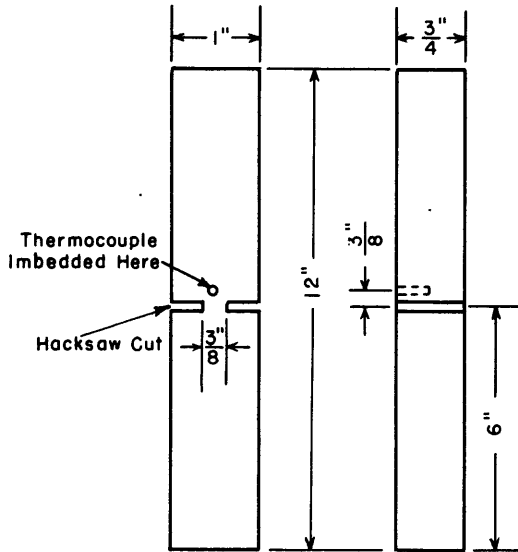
Notch Tensile Specimen Showing Hacksaw Cut and Thermocouple Location
